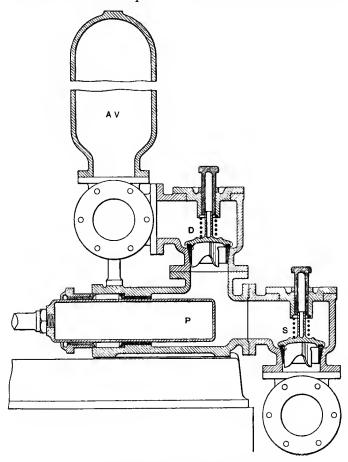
Feed pump (Messrs. Ernest Scott and Mountain).
